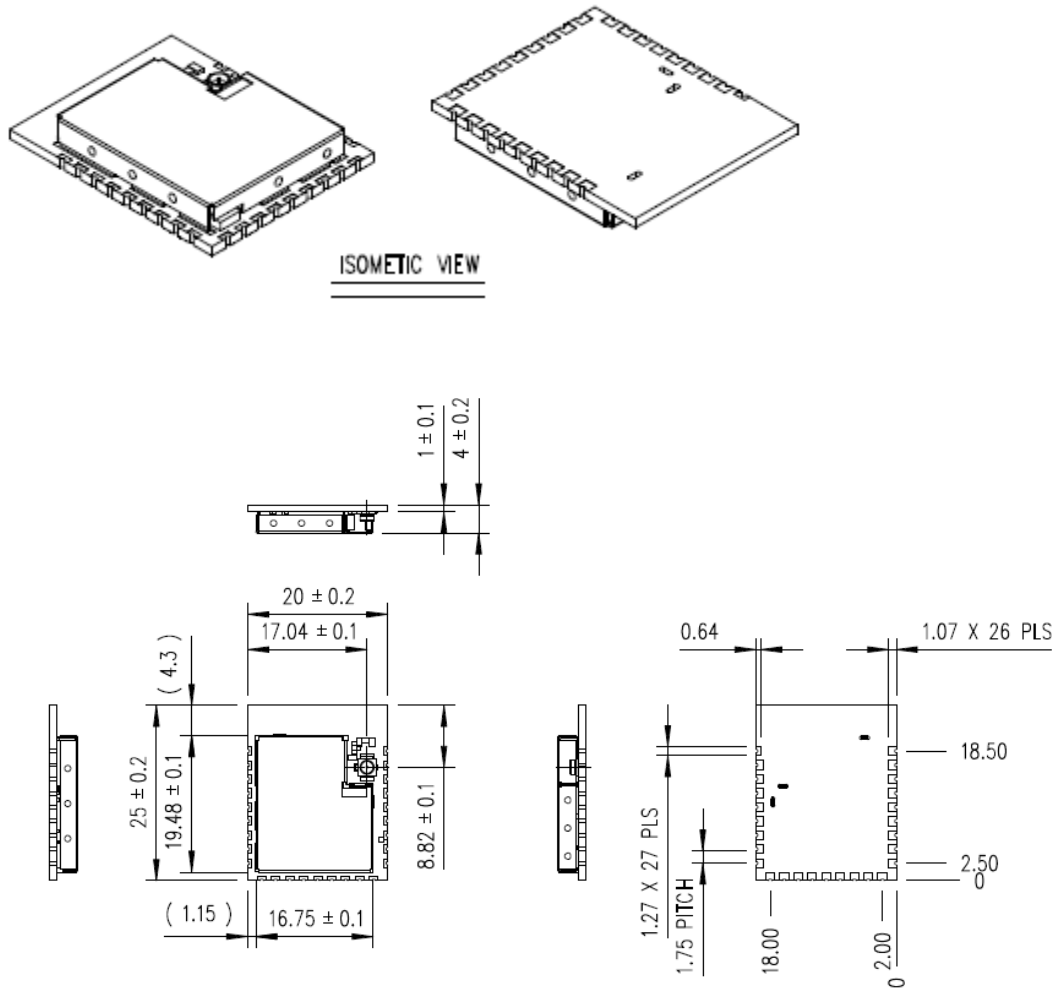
Mechanical drawing with shielding. (WNC's draft version)
